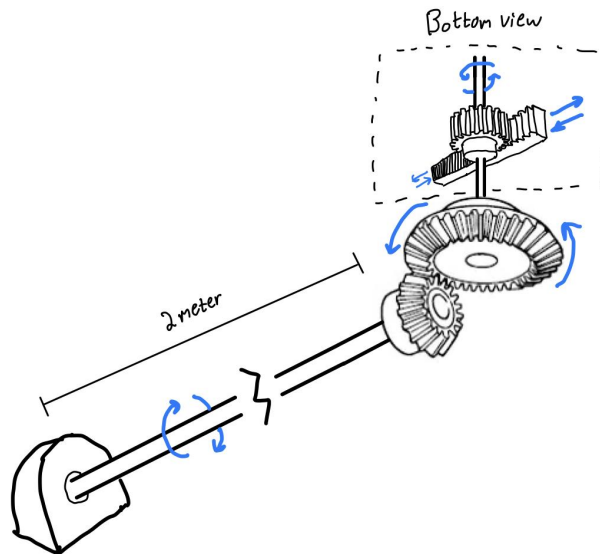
Rack and Pinion Design, including 2 bevel gears and a drive shaft
